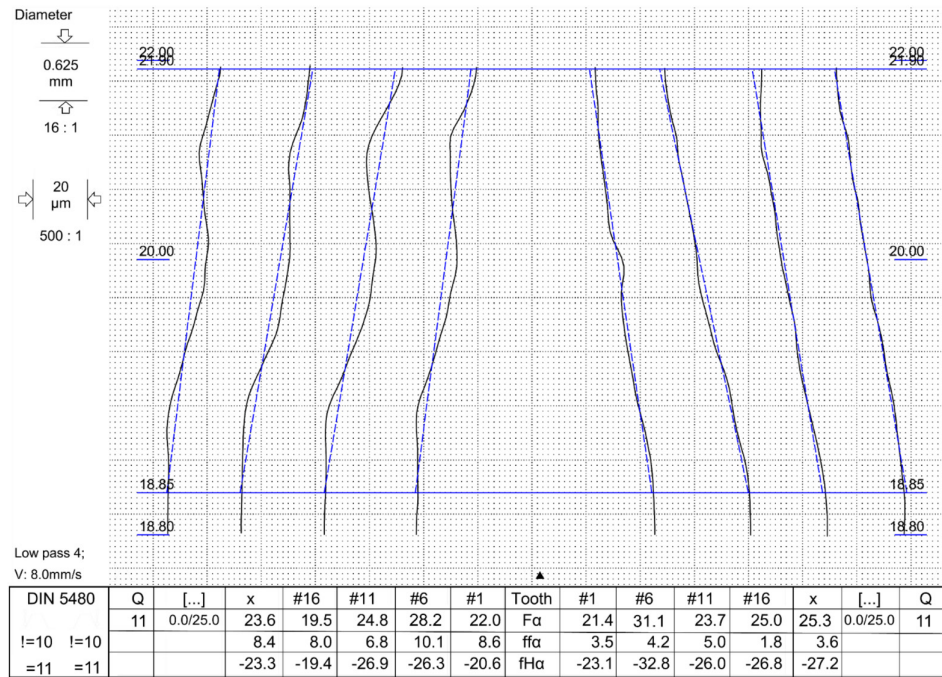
| Measurement and evaluation of the flank profile of the wood polymer composite gear with CMM. [Colour figure can be viewed at [wileyonlinelibrary.com](https://onlinelibrary.wiley.com)]
